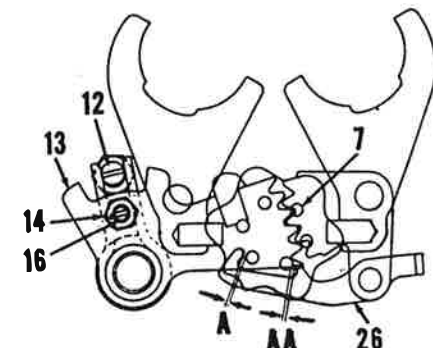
View of shift mechanism adjustment points for unit shown in Fig. Y19-22. Refer to Fig. Y19-22 for legend.
